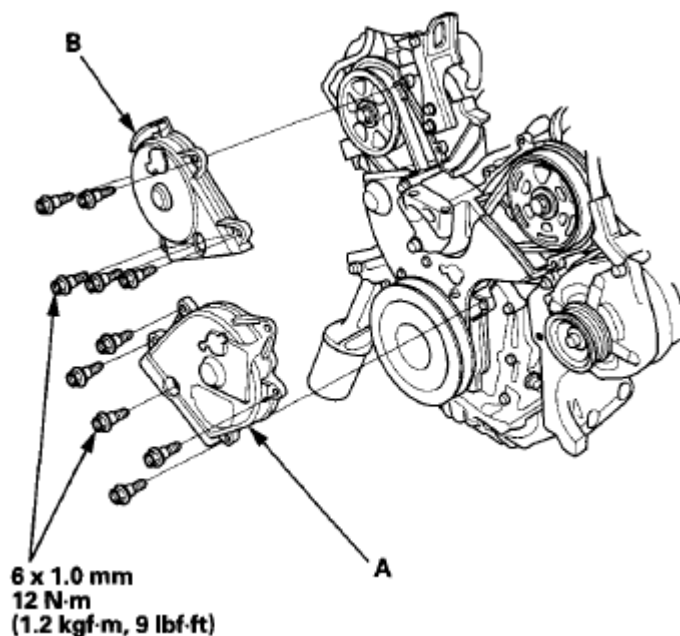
Installing Front Upper Cover And Rear Upper Cover With Torque Specifications
